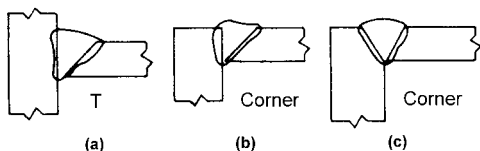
Welds in T- and corner joints. (a) and (b) Single-bevel welds. (c) Single-V-groove weld
